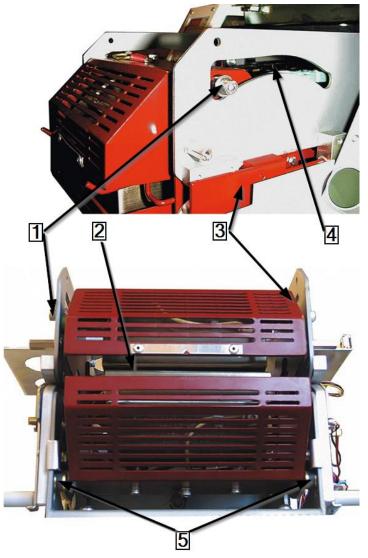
Adjusting the heater carrier assembly (shown in forward position)
